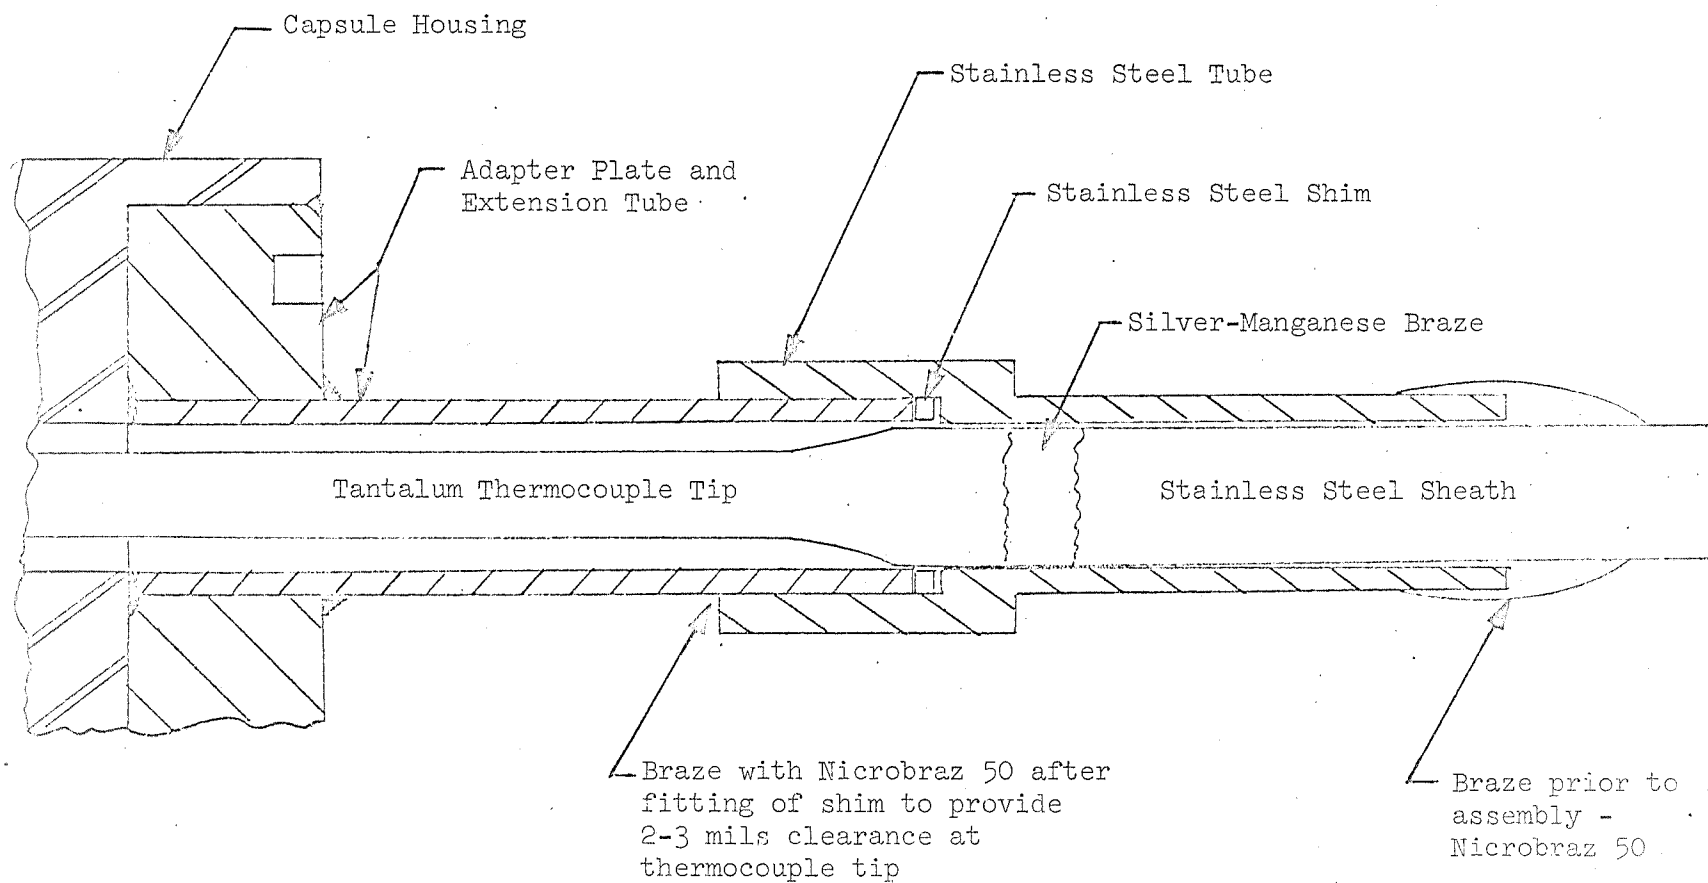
THERMOCOUPLE BRAZING TECHNIQUE USED ON ASSEMBLY 4A
